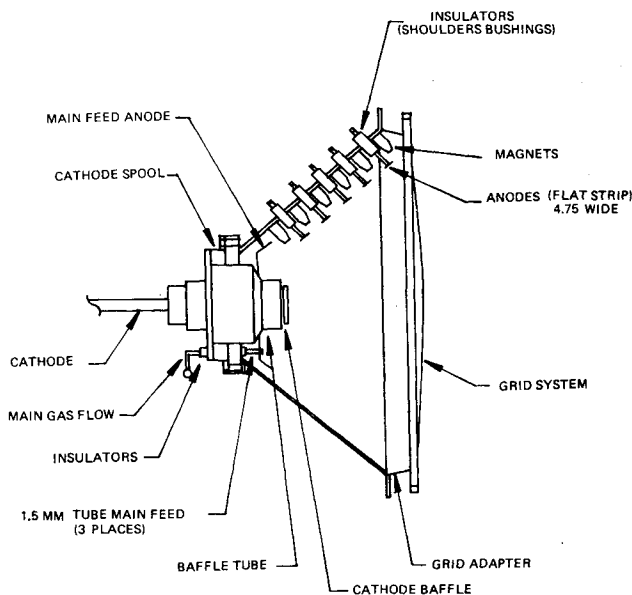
Schematic of 5.7-cm-long conical thruster assembly.
